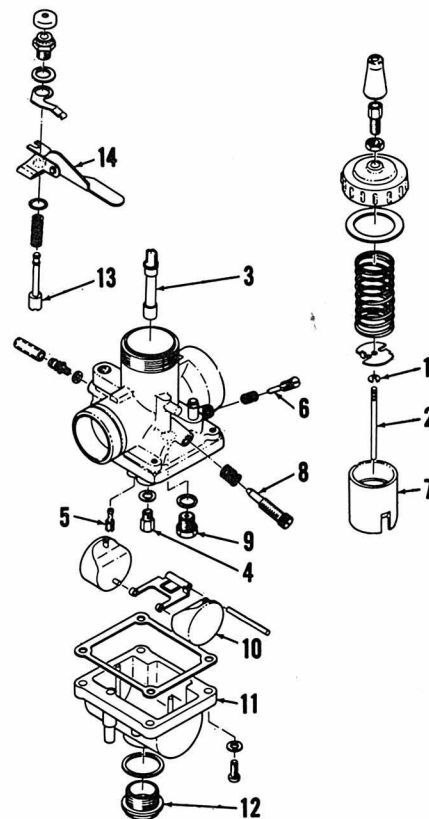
Exploded view of carburetor used on R5 models.
